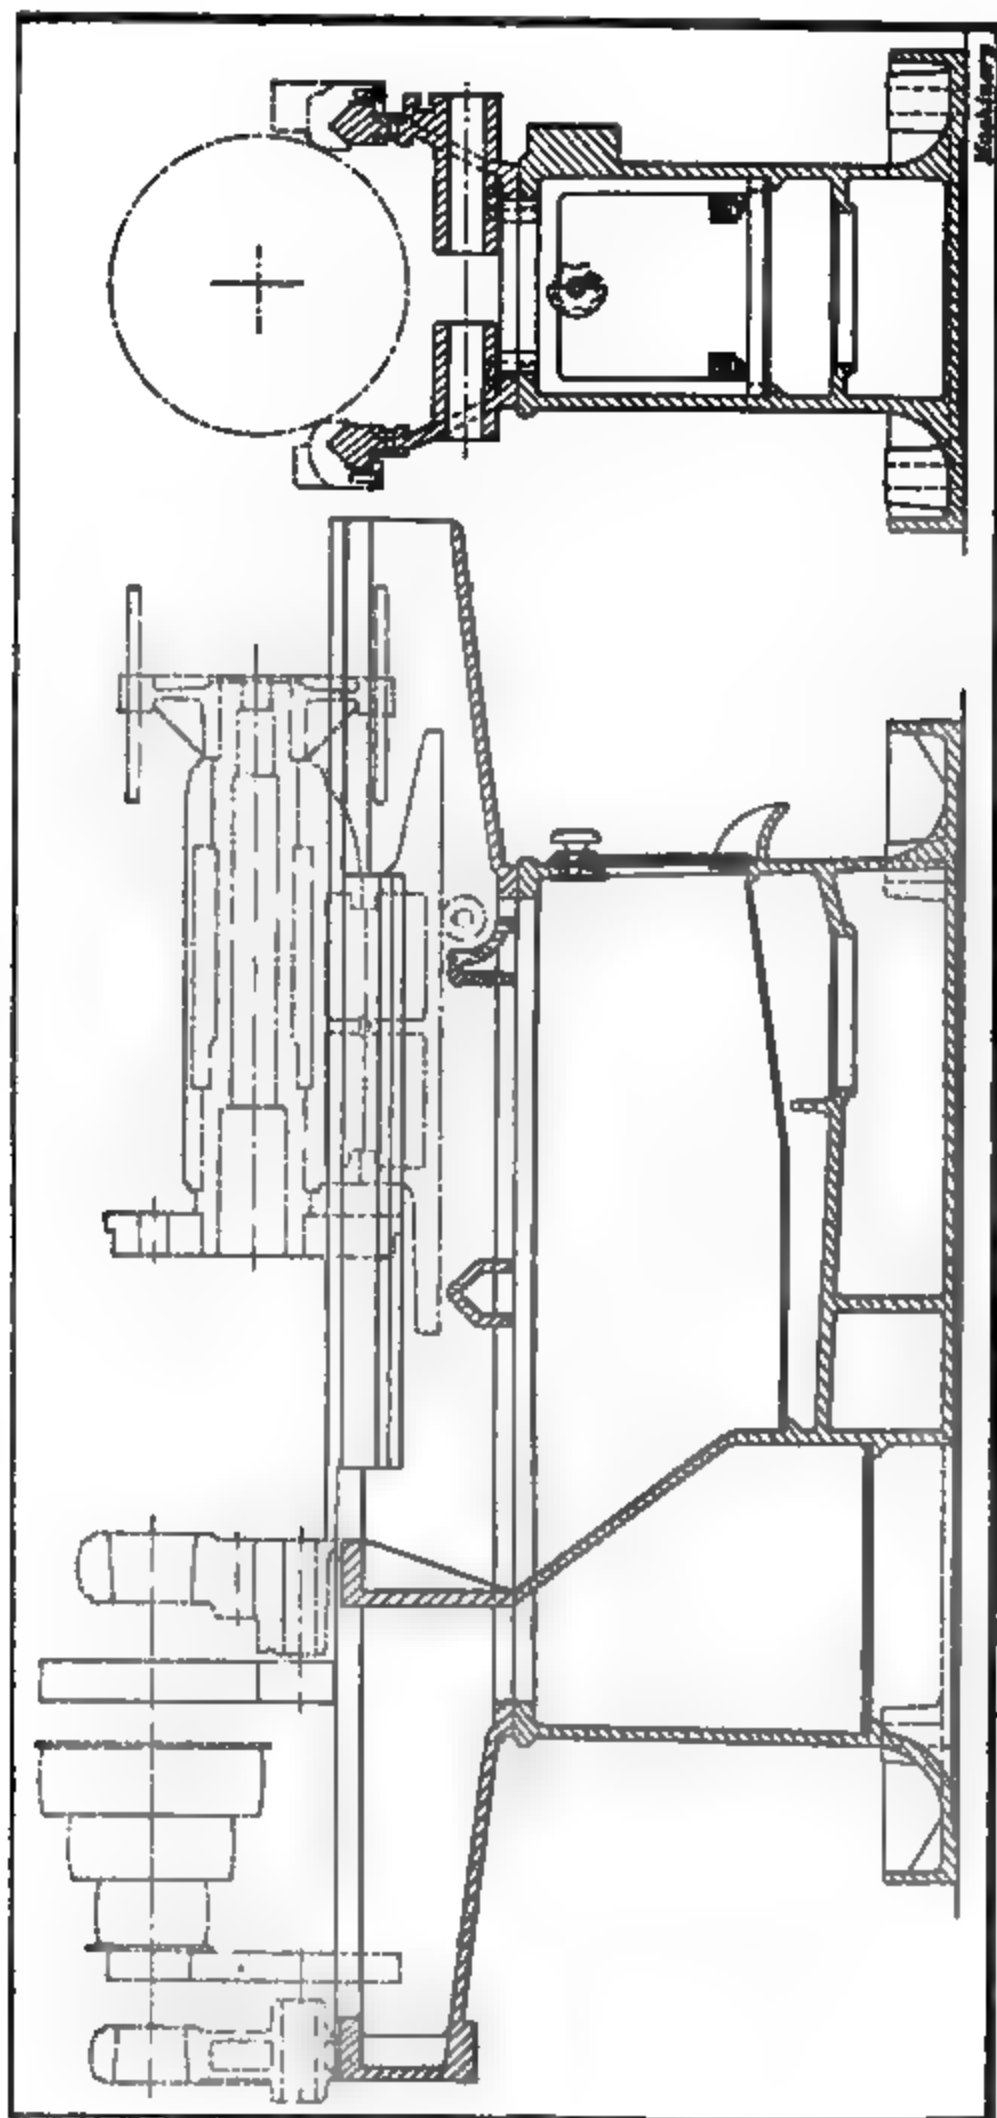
Bed for Pittler Turret Lathe as built by the Leipziger Werkzeugmaschinenfabrik, Leipzig-Wahren, Germany.
